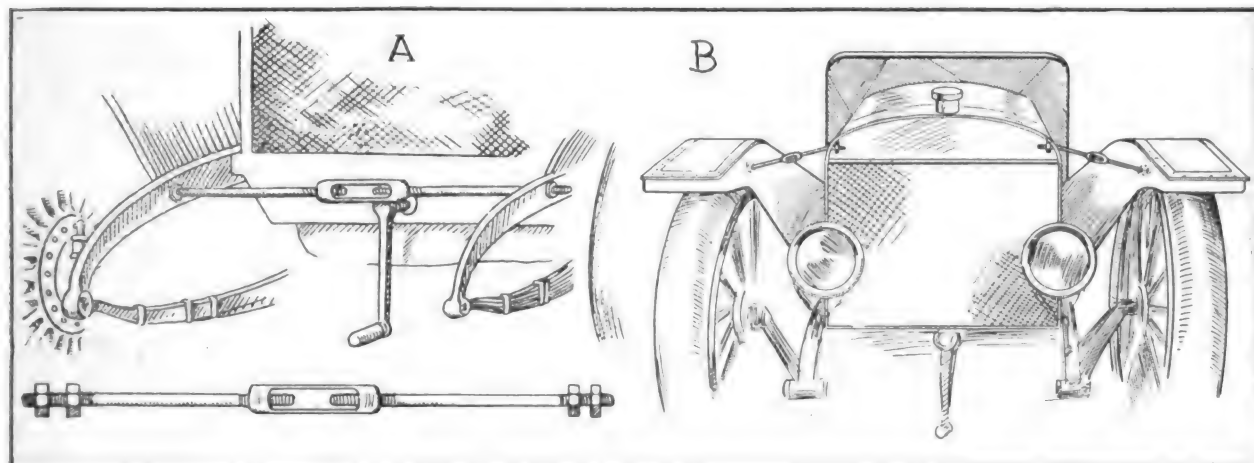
A, Cracked Chassis Frame Reinforced by Plates and Tie Rod Between the Spring Horns; B, Rattling Mudguards with Stays to Radiator.
